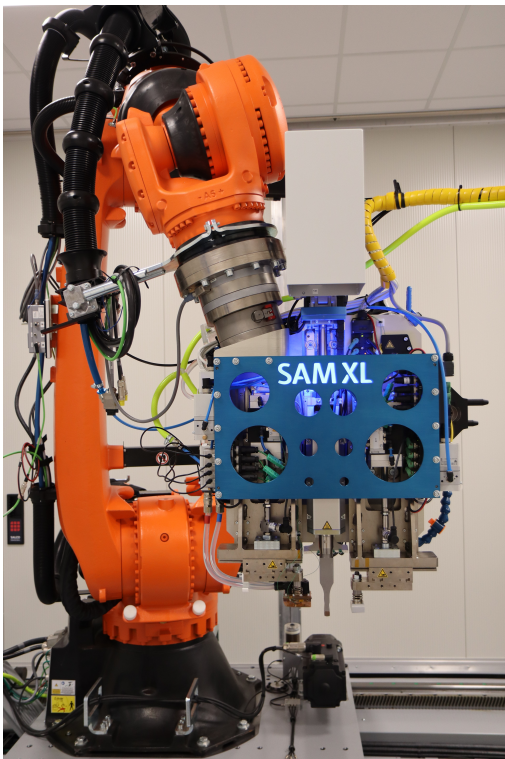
Front view of SAM XL Continuous Ultrasonic Welding end effector on KUKA KR560 R3100-2 robot
